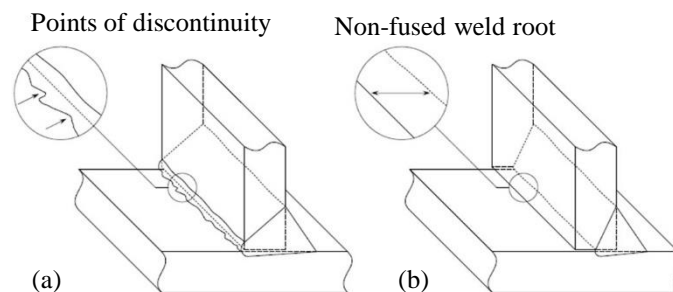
Weld root geometries for (a) fully penetrated, and (b) partially penetrated web-to-flange connections with a single-sided weld in accordance with [35].
